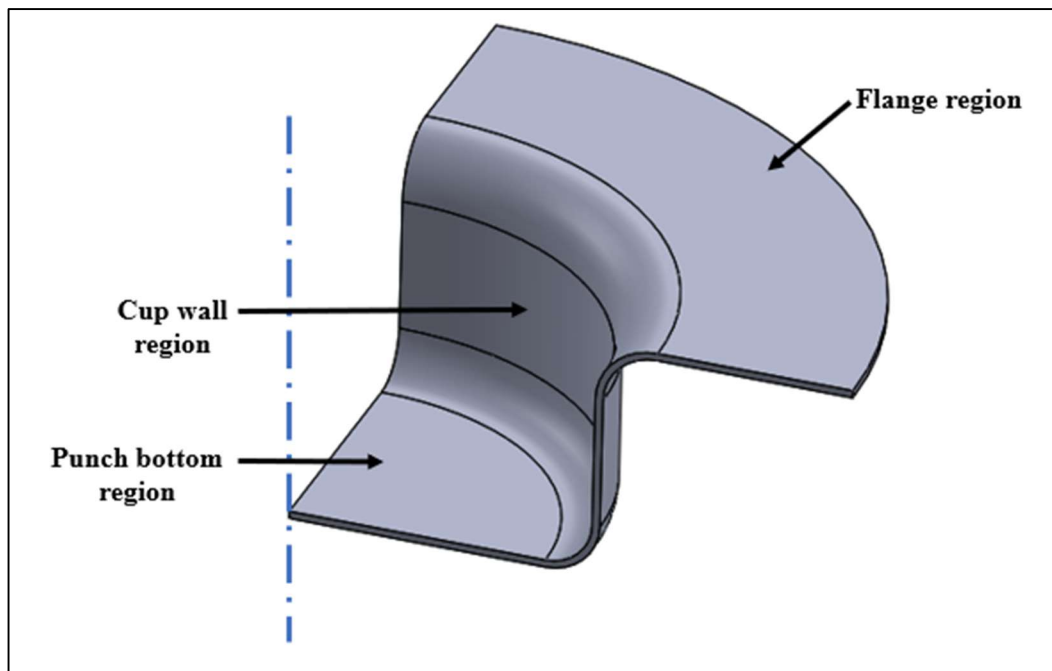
A quarter segment of a circular blank in deep drawing operation.
